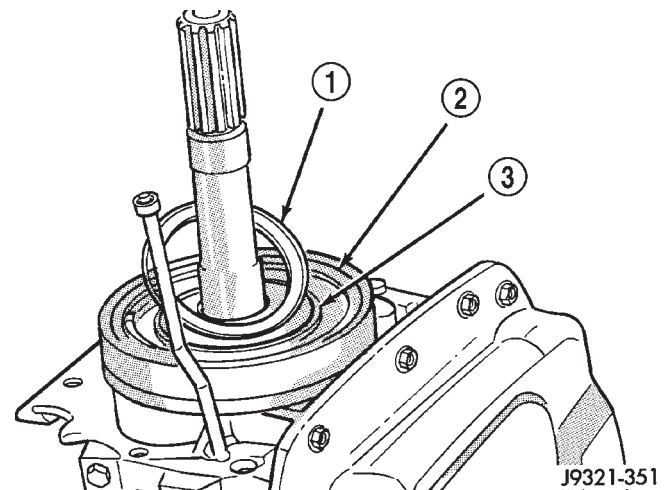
Overdrive Piston Thrust Bearing Removal/Installation
